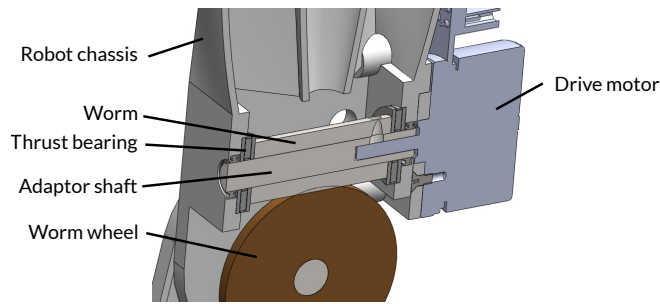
Cross sectional view of the drive motor and worm gearing utilised in the joints of miniBLUE. The drive motor is mounted externally for ease of access, and an adaptor shaft interfaces the motor with the worm gear. The worm gear is sandwiched between two thrust bearings to transfer the load to the chassis of the robot rather than to the motor shaft.
